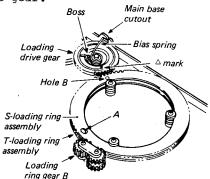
Loading ring assembly/ loading drive gear
